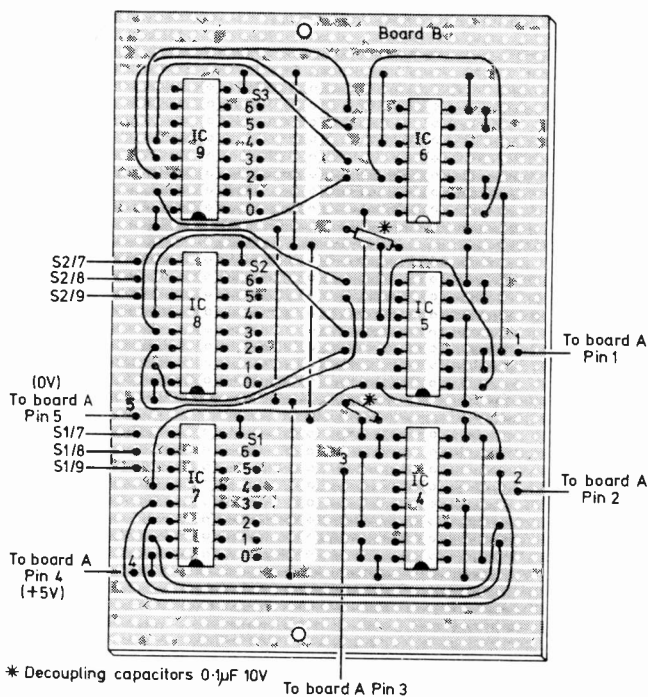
(b): Component layout and Veroboard cutting details for Board B, carrying the counters and decoders.
